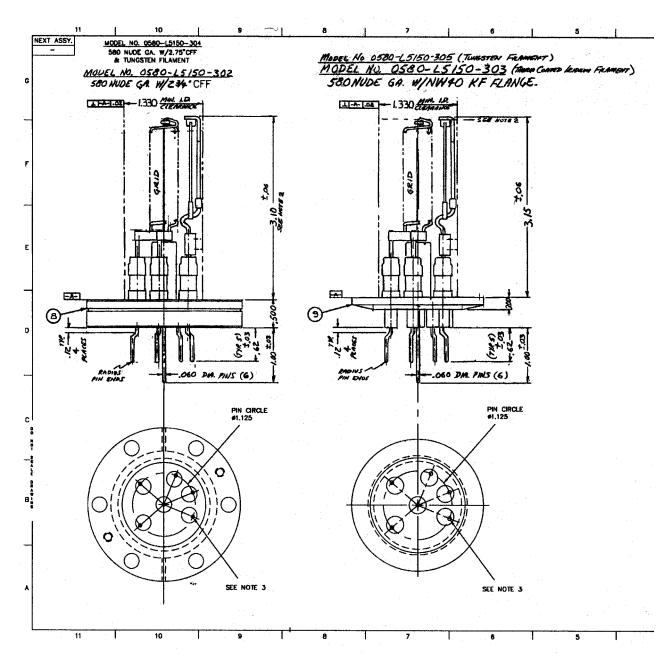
580 Nude Ionization Gauge Tube Outline Drawing
